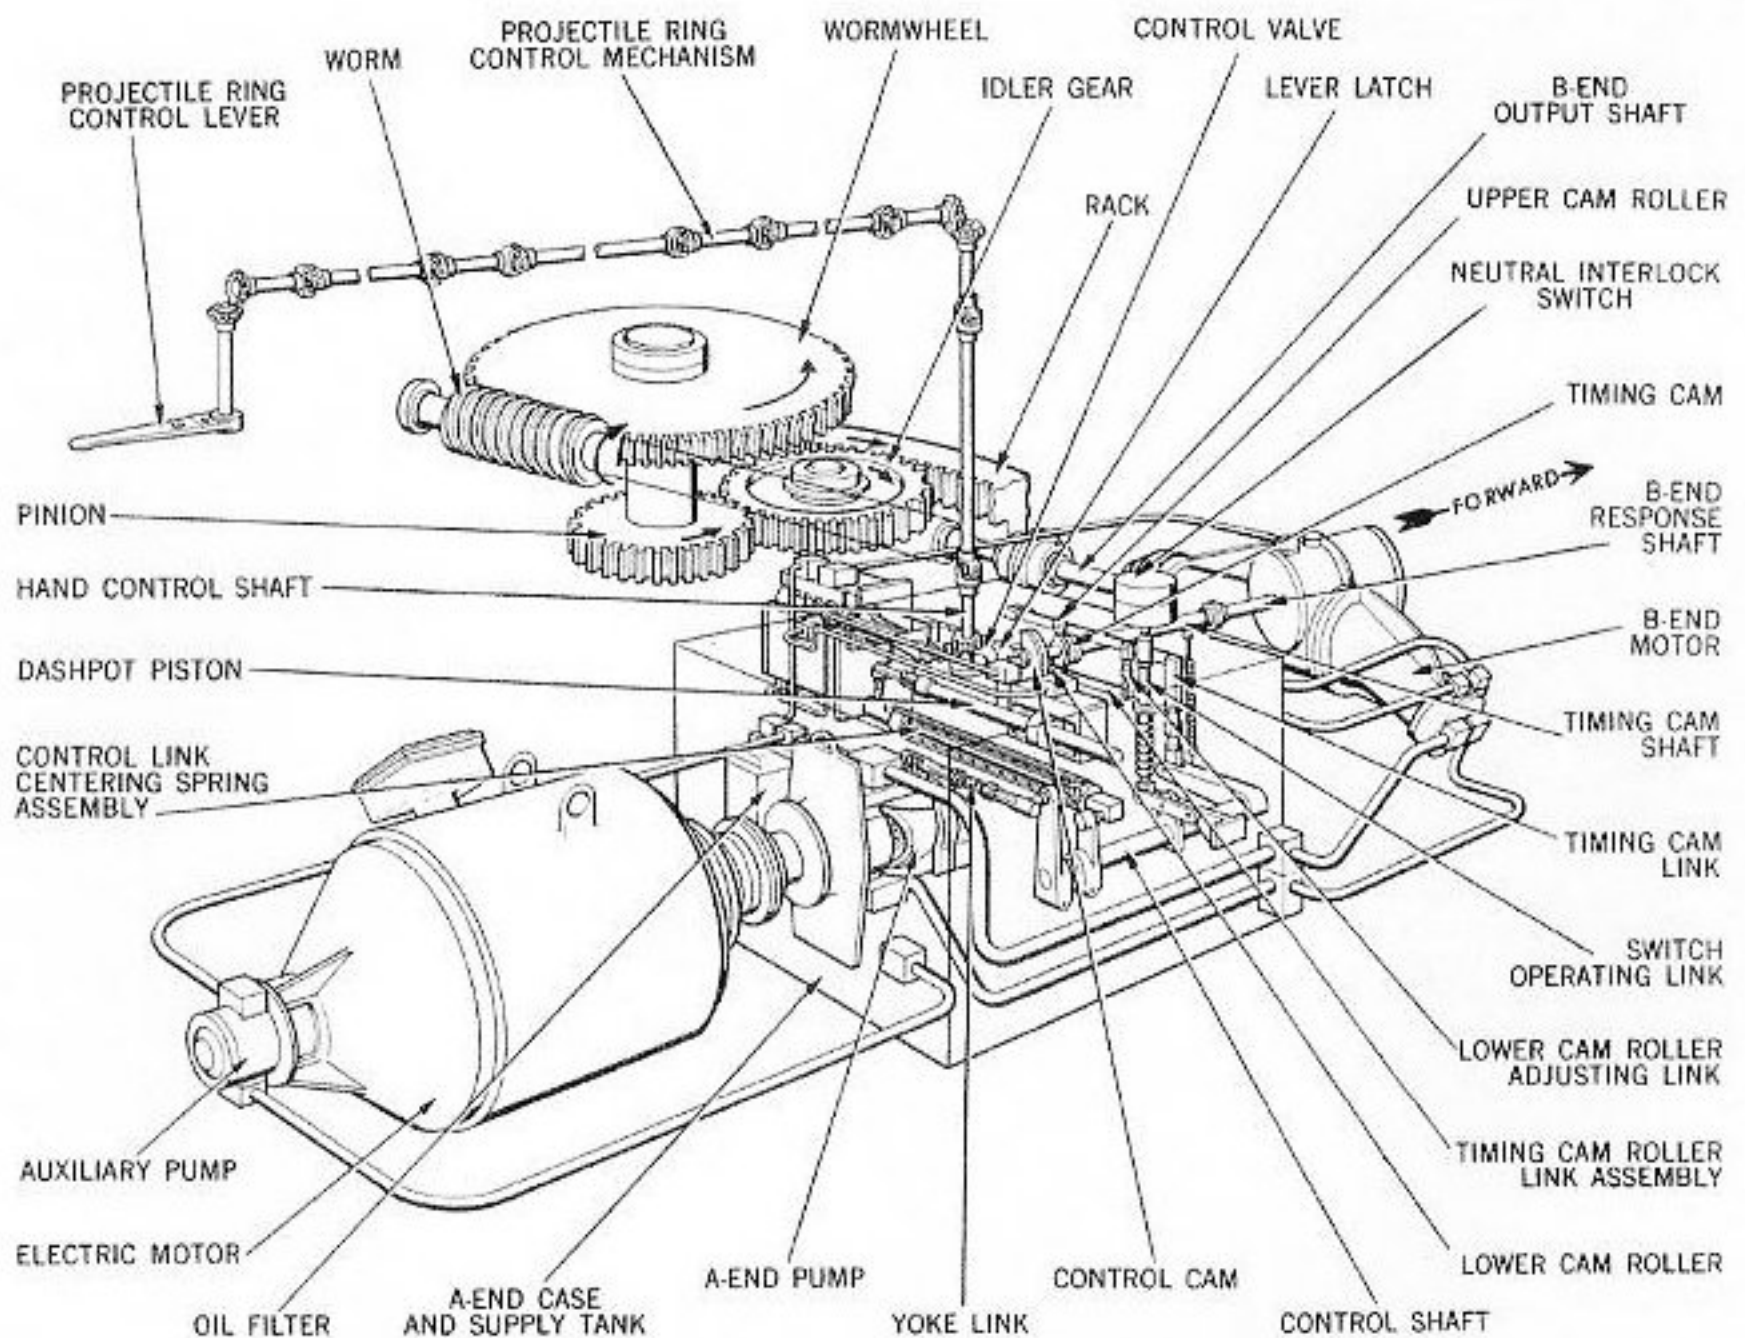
Projectile Ring Drive Components, Schematic Arrangement
